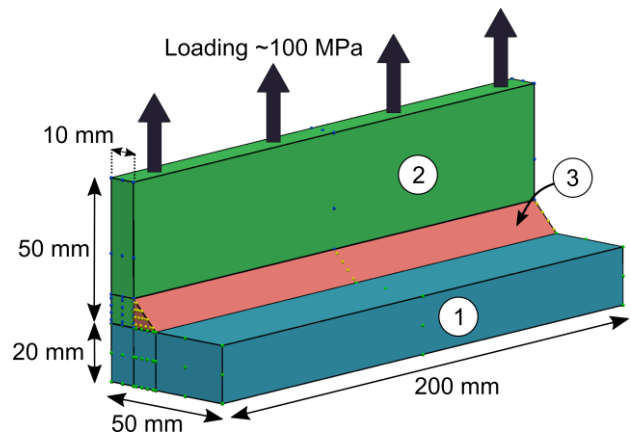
Base geometry of the fillet weld model with patch numbers
